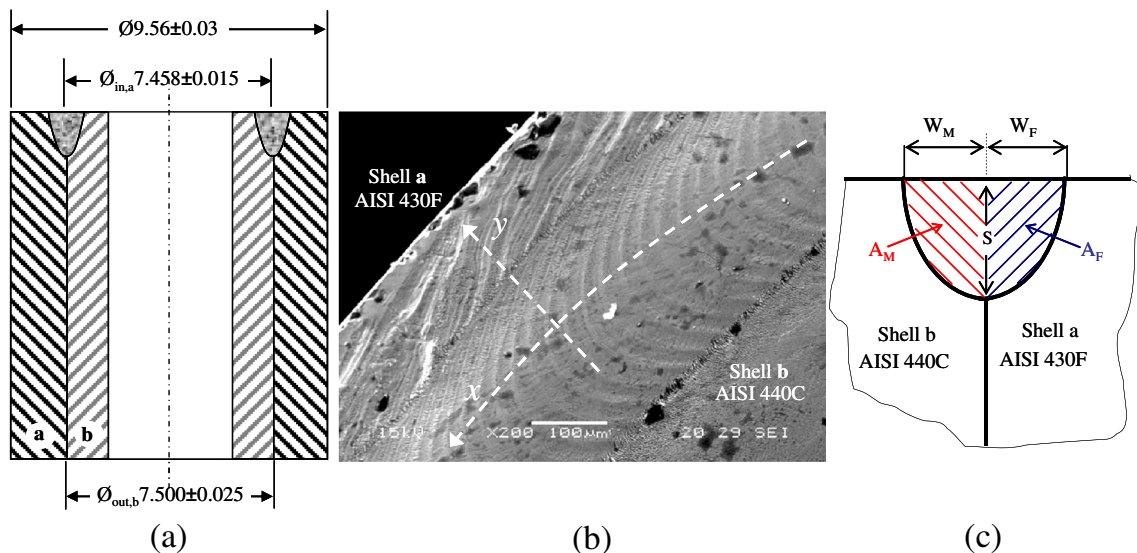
a Draft of a typical axial section of the welded components with relative dimensions. b Top SEM view of a dissimilar butt welded surface at the intersection of AISI 430F and AISI 440C: x -axis is circular and set at the material interface, and y -axis is positive in the direction of AISI
